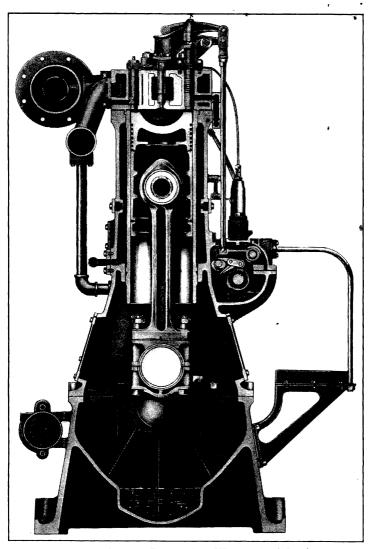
Chicago Pneumatic RHB-50 Diesel Engine.
